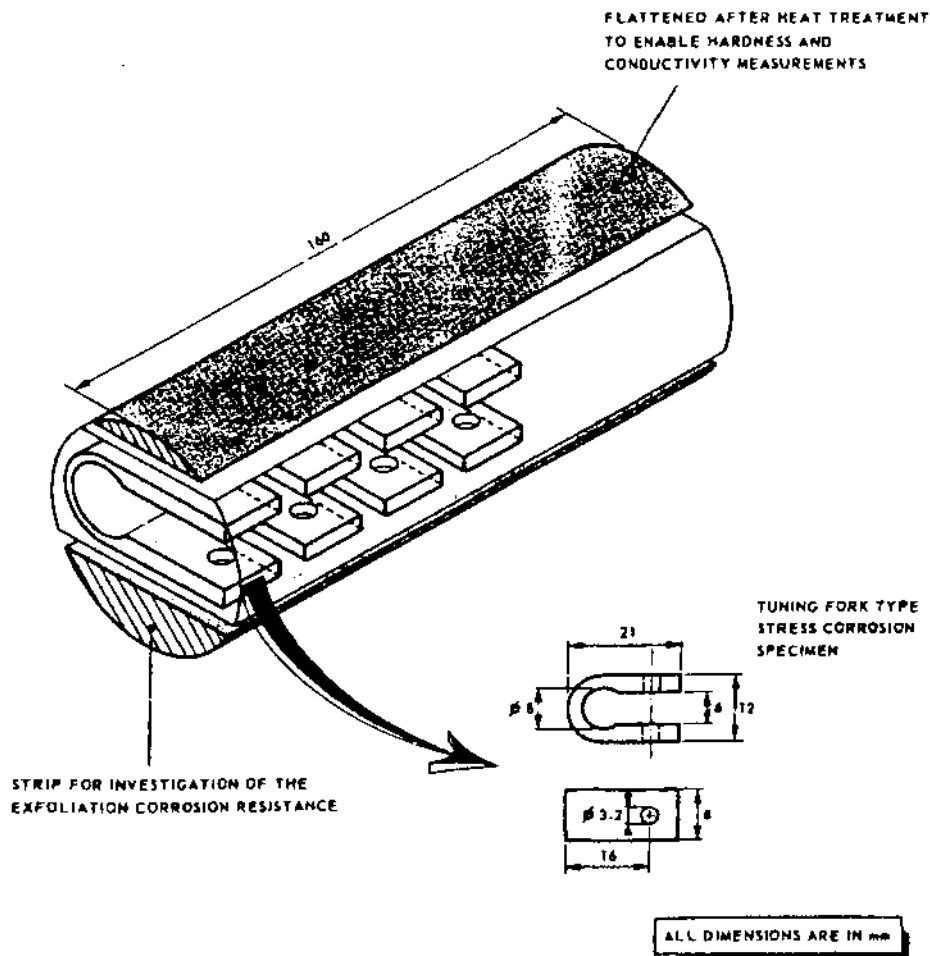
Location of stress corrosion specimens in the Jominy bar.
